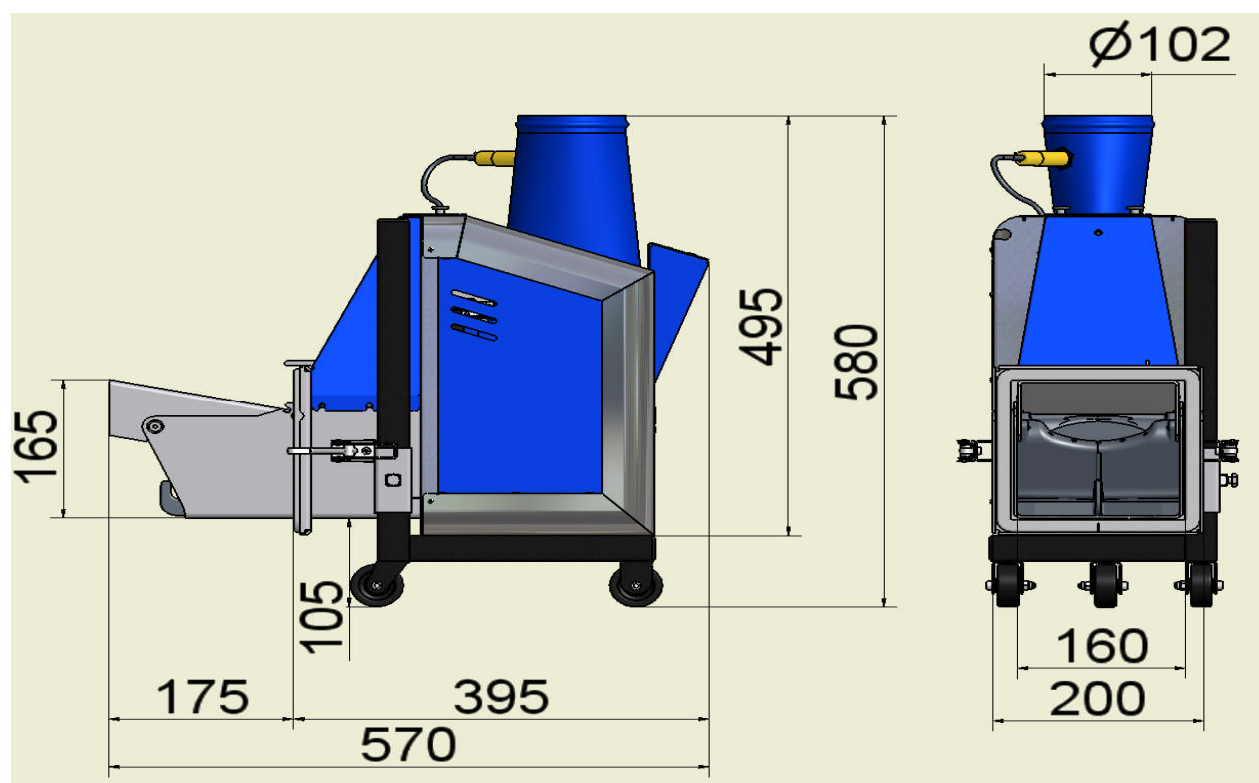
Dimensional drawing NH-burner (All measurements in mm)
